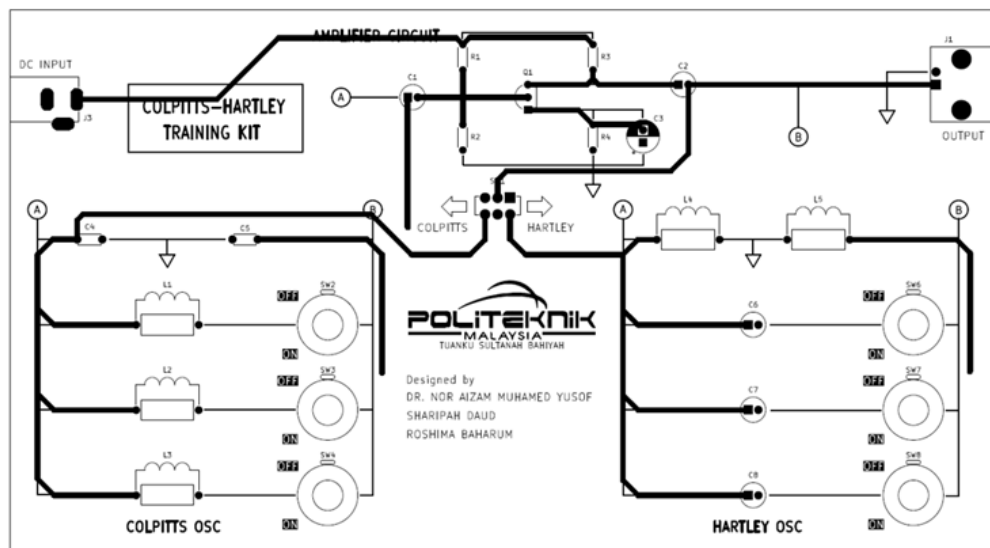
PCB Pattern Layout of Colpitts-Hartley Oscillator
